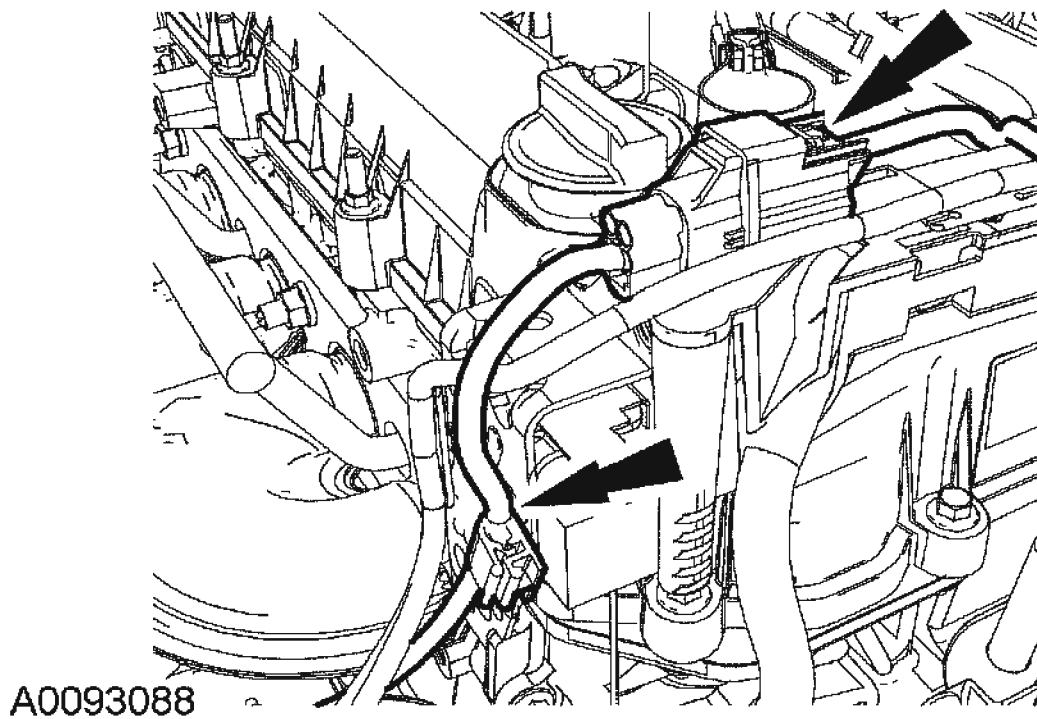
Connecting Upper Exhaust Sensor Electrical Connector And Retainer
